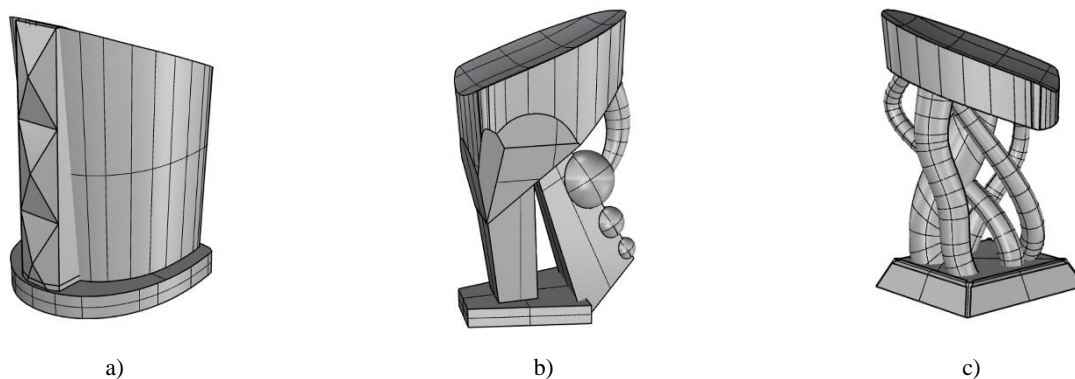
CAD model of heel prototype: a) prototype 5, b) prototype 6, c) prototype 77
